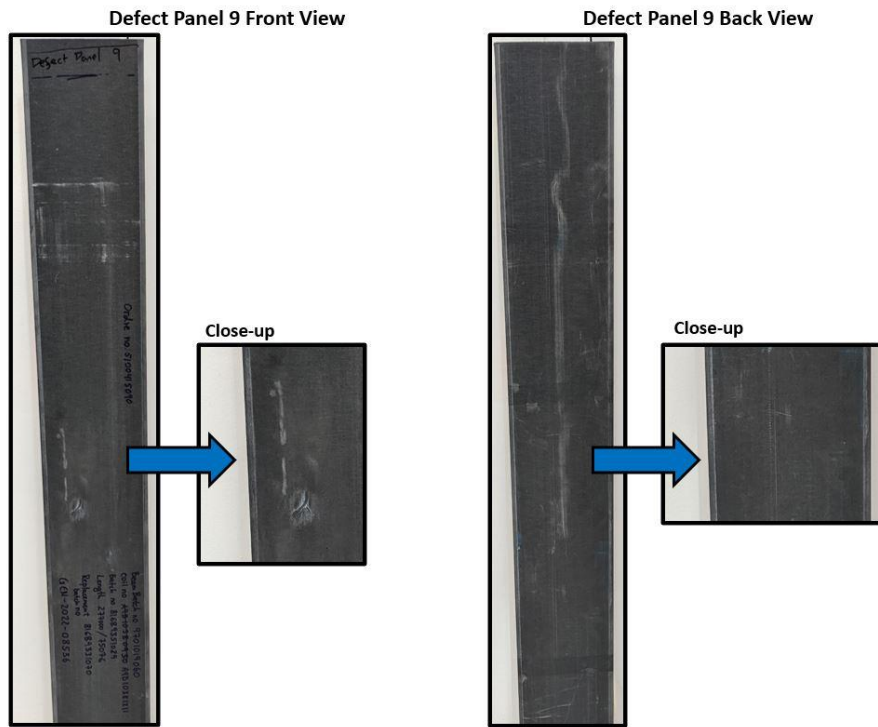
Defect panel 9 with surface defect indications highlighted
